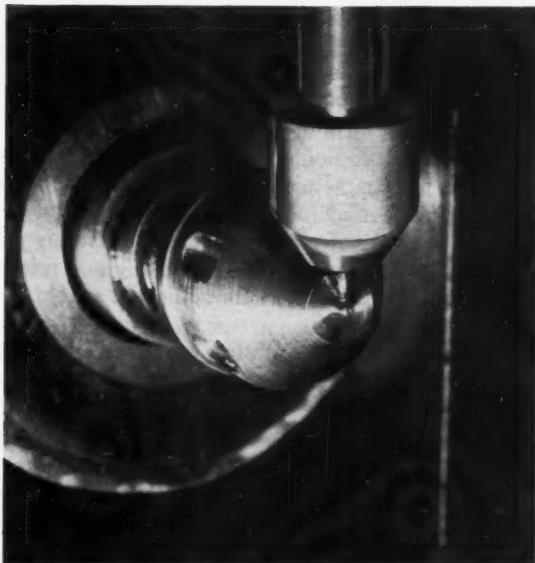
(Right) The special design of this machine accurately controls the feed limit of a tapered reamer.
